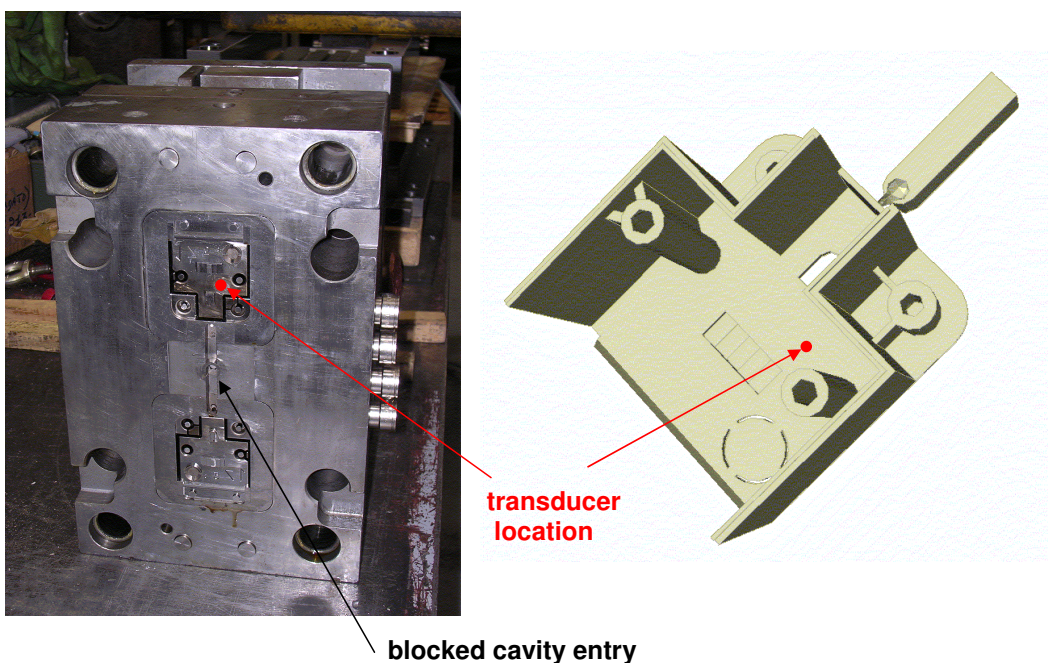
Geometry of the Schneider prototype part, mold cavity, schematic cavity geometry and transducer location.
